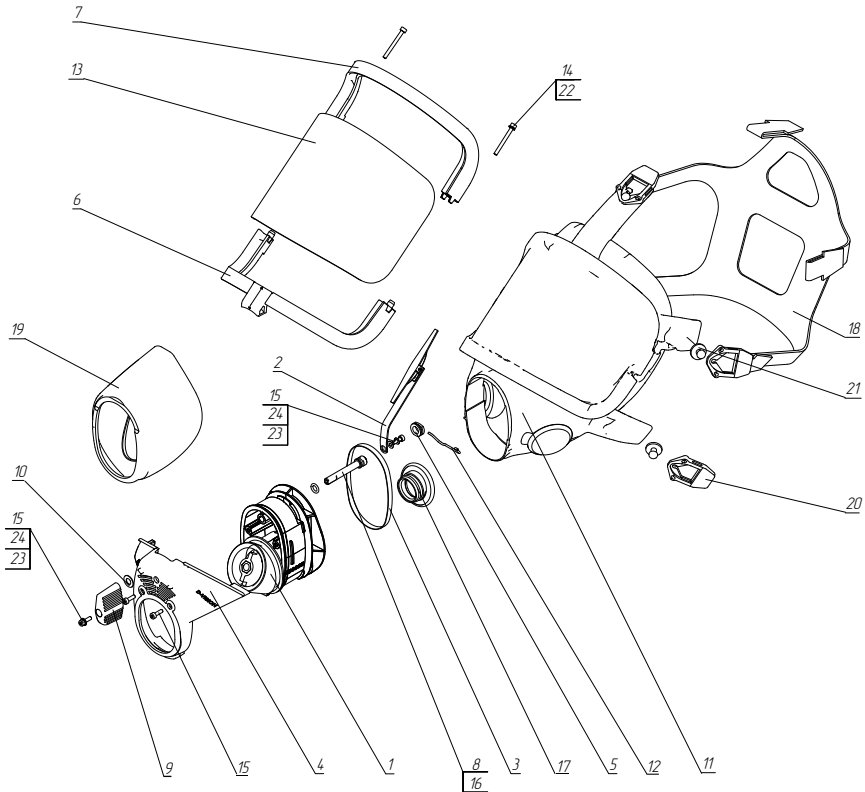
Component-wise view of the mask with central bush with a thread 5/16"
